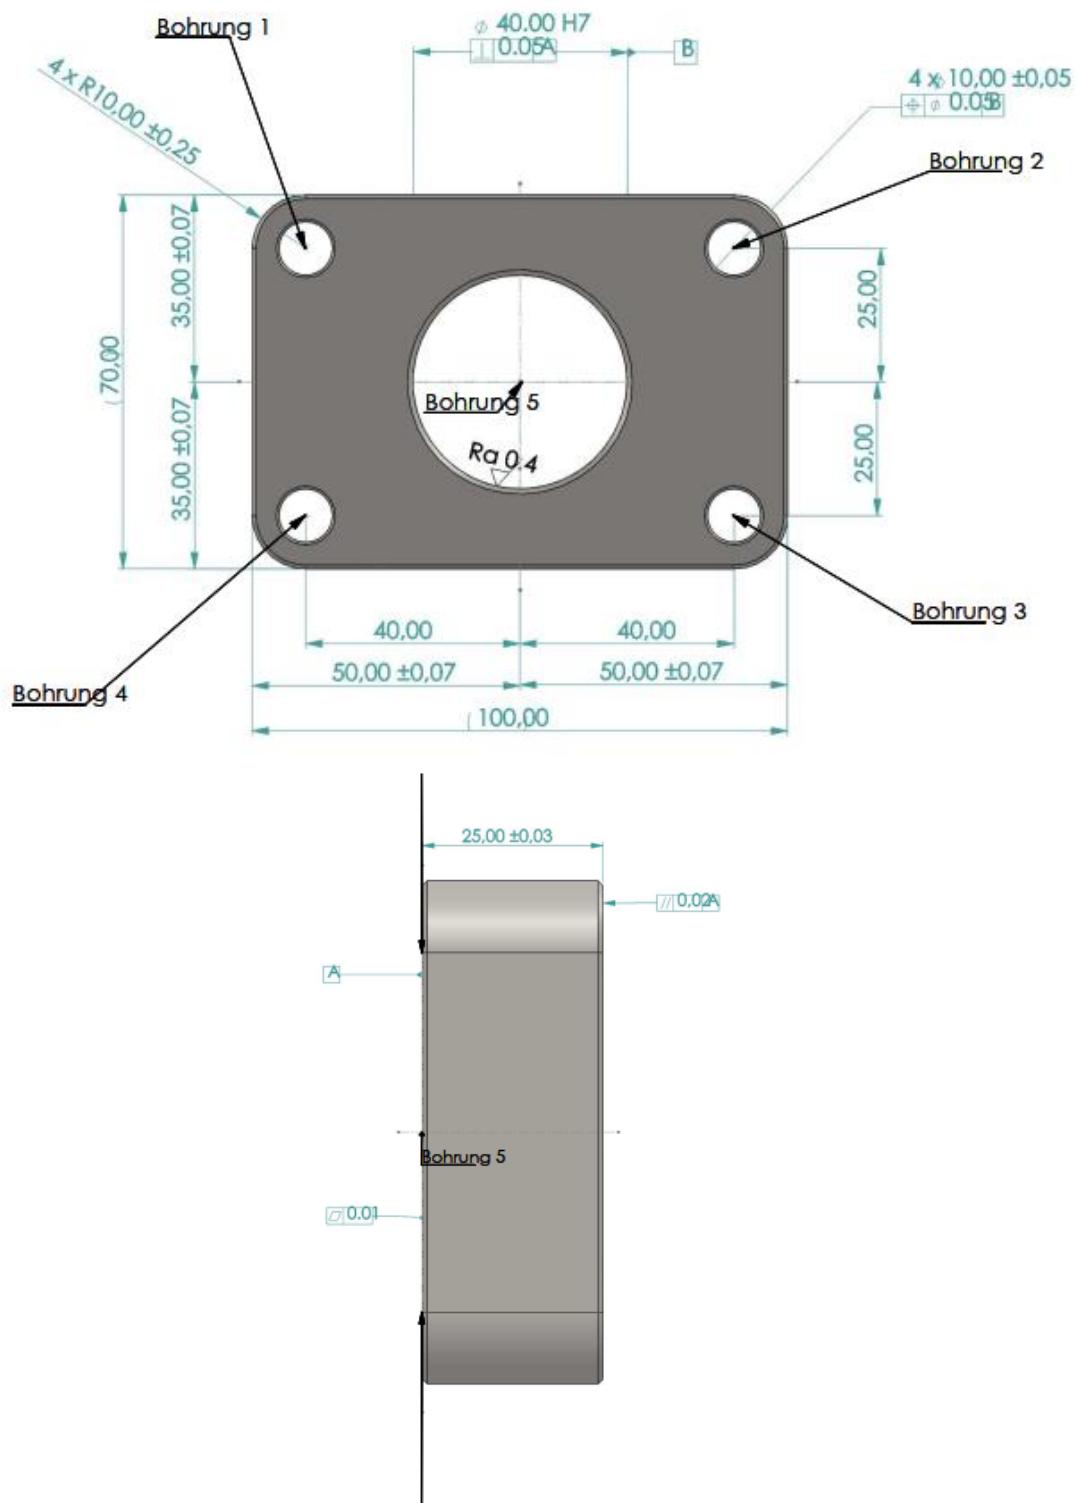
Drawing of the Demonstrator Use Case Example by University of Bayreuth
